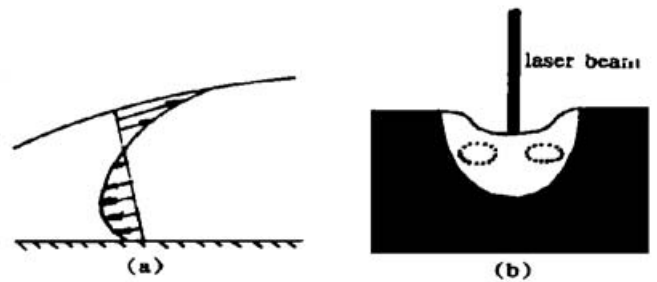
Schematic diagram of the flow in the welding pool driven by surface tension gradients
